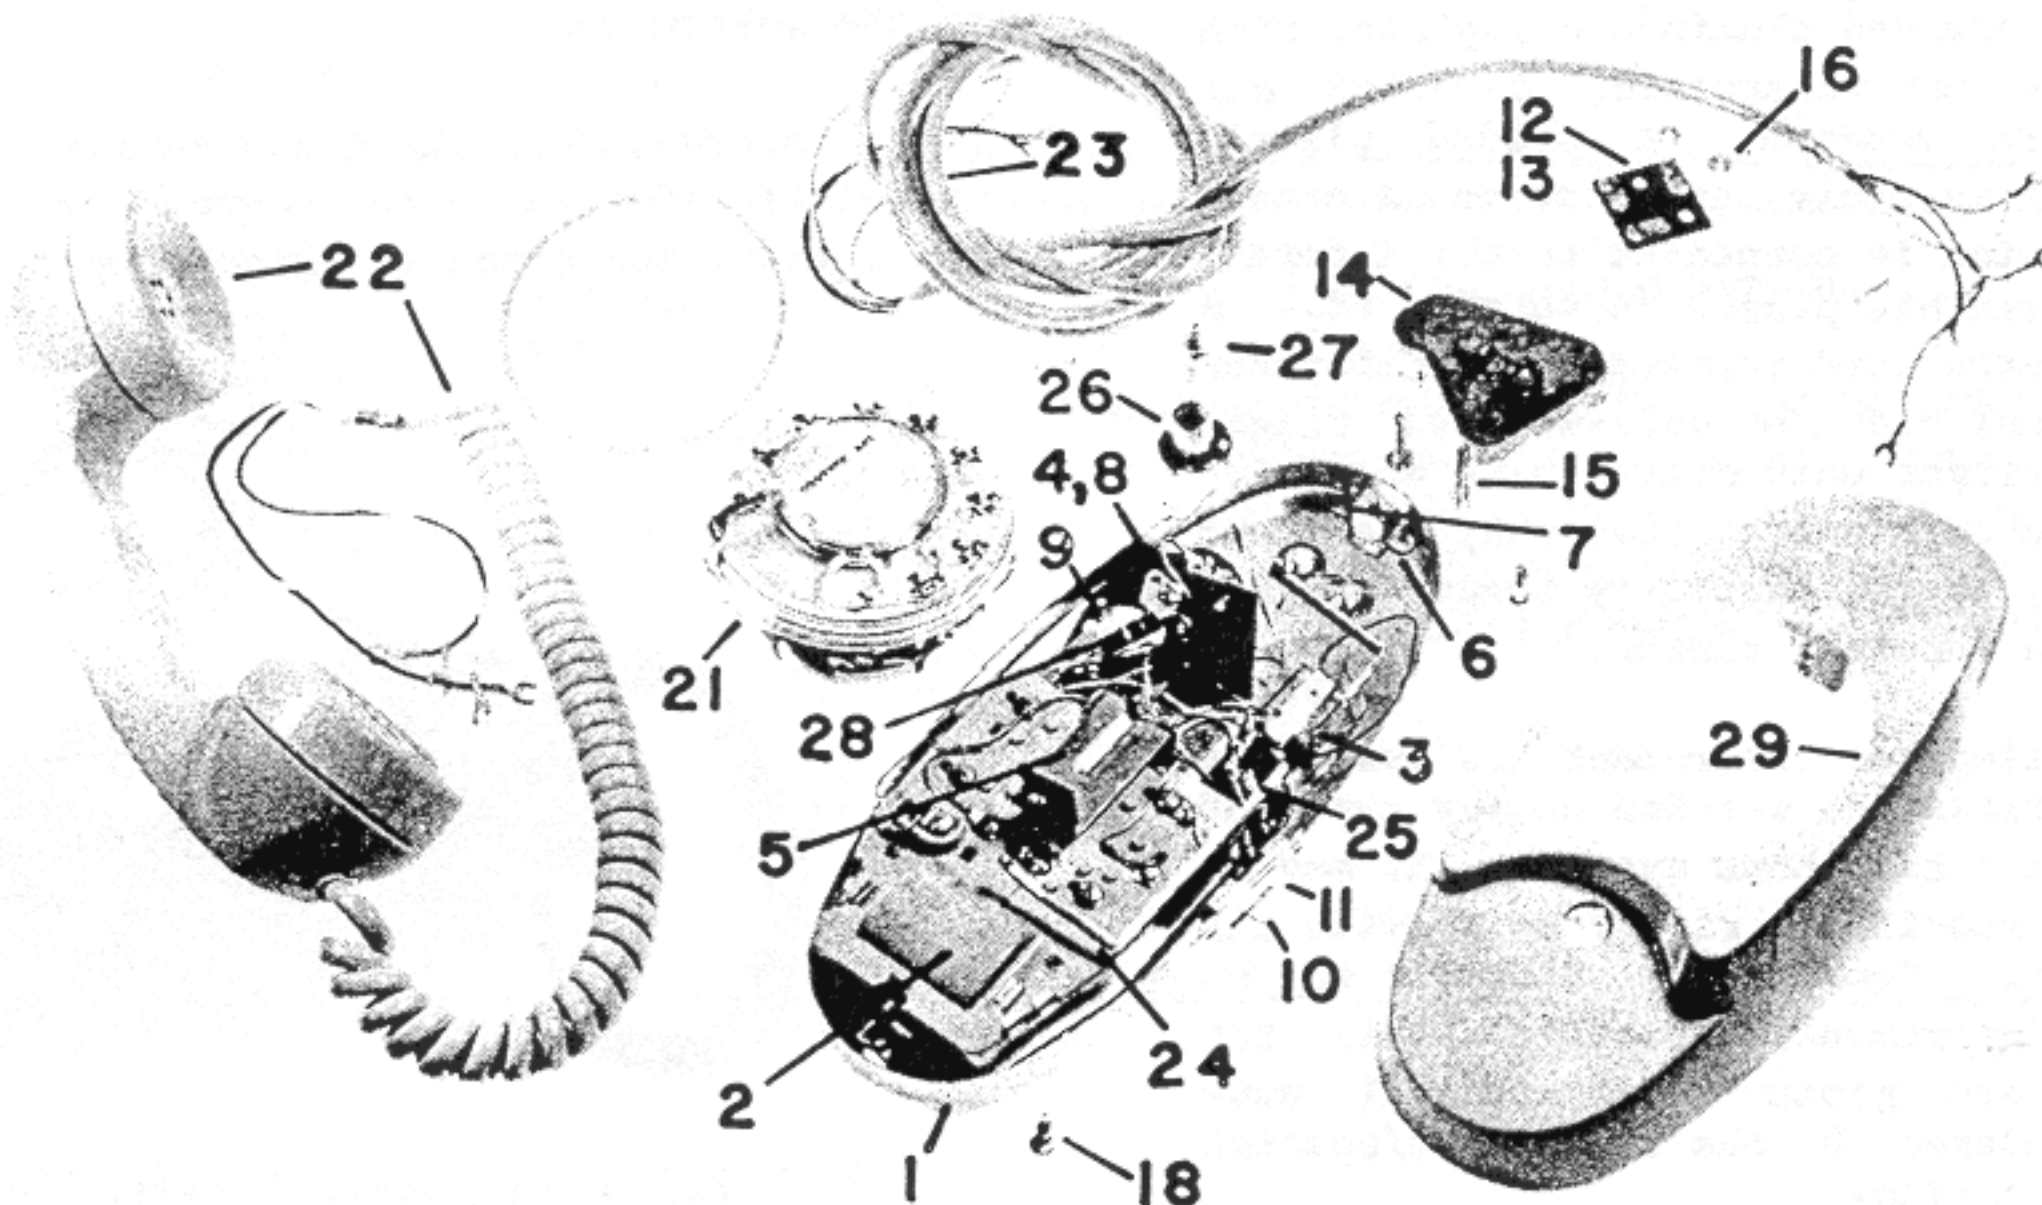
COMPONENT PARTS - EXPLODED VIEW
